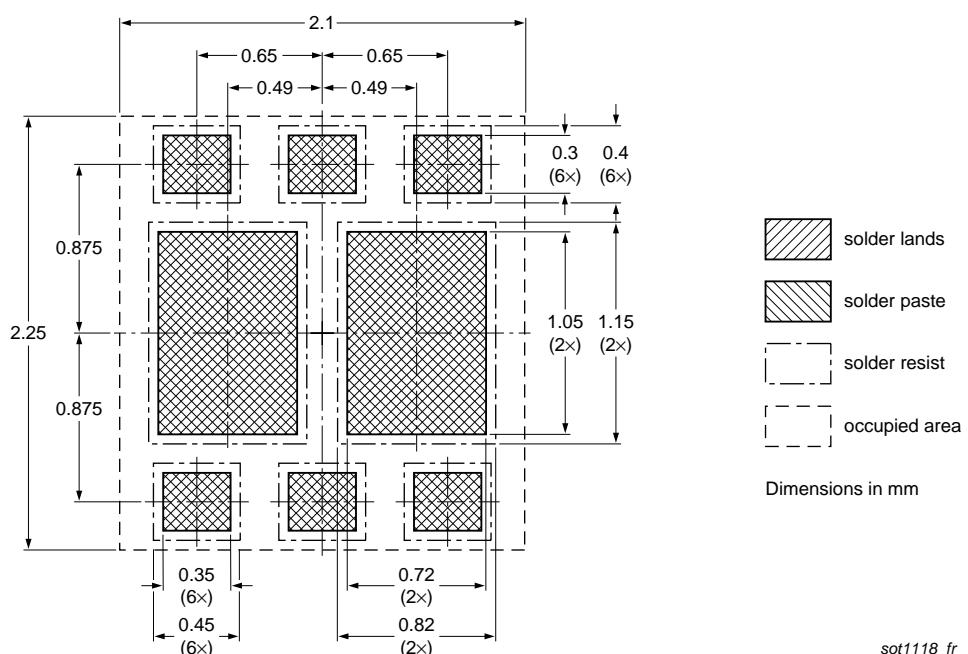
Reflow soldering footprint for SOT1118 (DFN2020-6)
